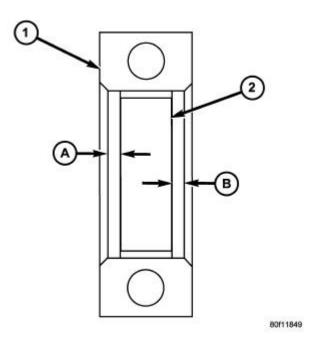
Connecting Rod Bearing Inspection Courtesy of CHRYSLER LLC
